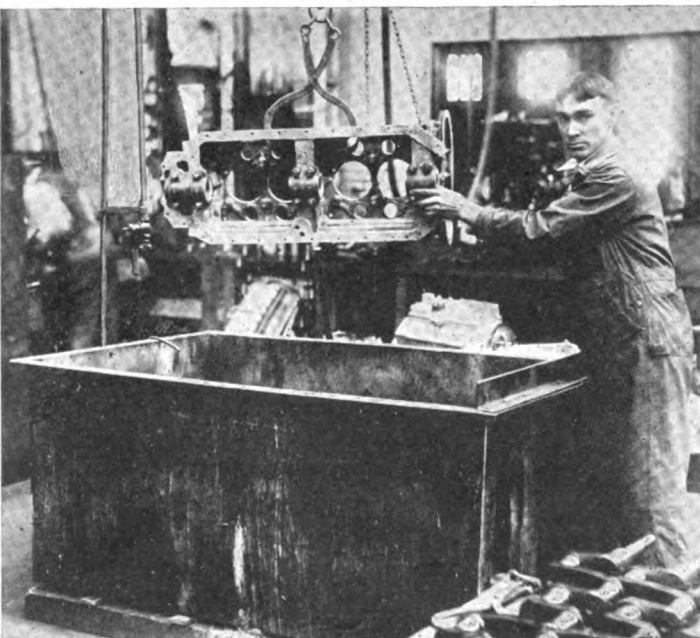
Cleaning crankcase in motor assembly room for progressive truck assembly
